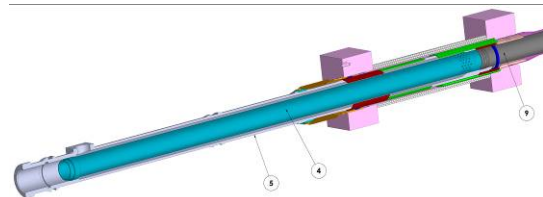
Schematic representation of the liner tube mounting inside of end fitting
